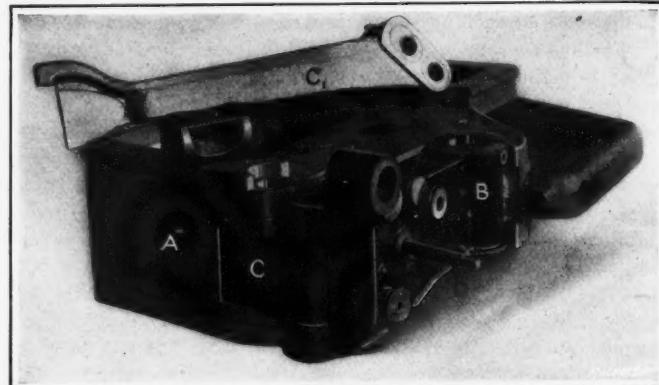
Parts of Fellows Gear Shaper Cabinet, assembled ready for Drilling Operations
